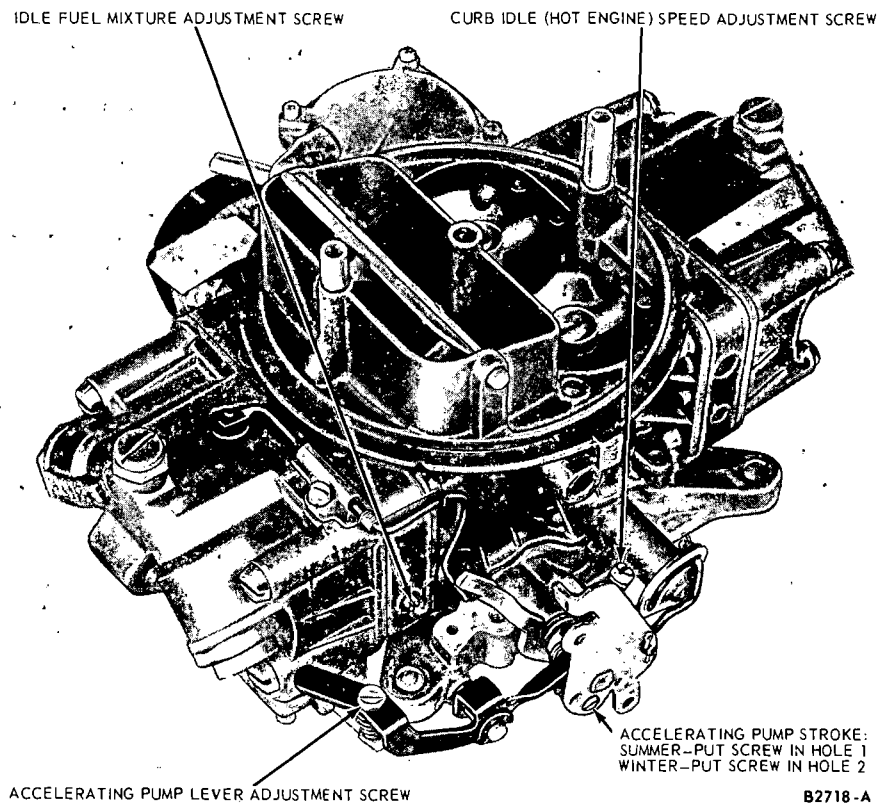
Accelerating Pump, Idle Fuel Mixture and Idle (Hot Engine) Speed Adjustments—Holley
